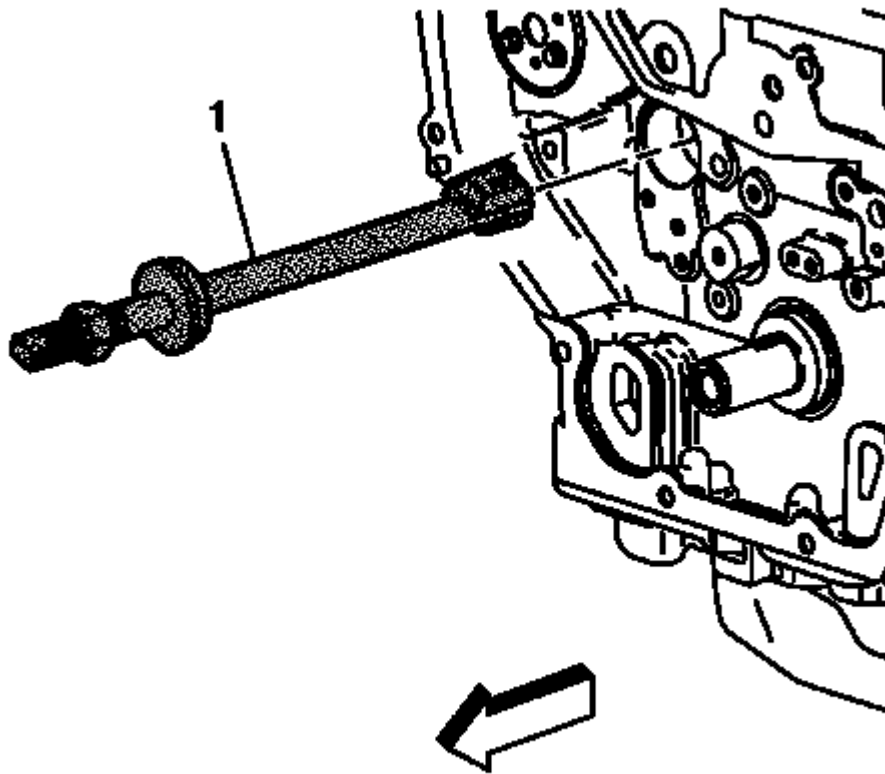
View of Special Tool EN-43650 on the Balance Shaft Bushing
